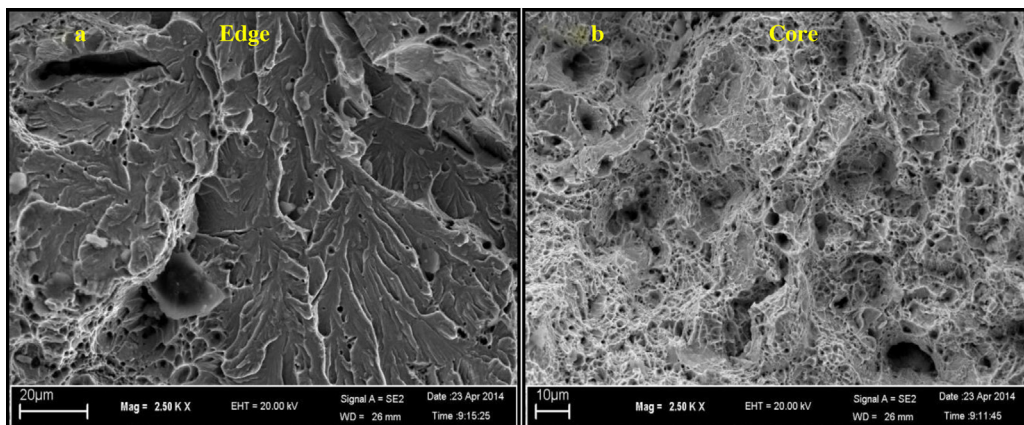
(a) Fractography analysis of side A of the failed component; (b) fractography analysis of side B of the failed component.
